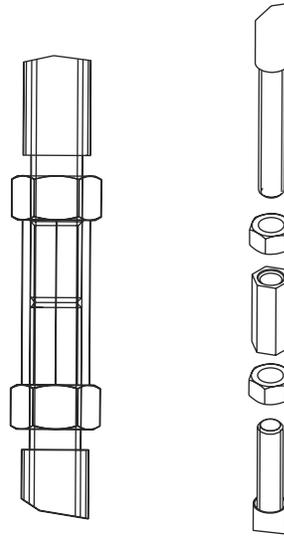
Threaded Rod and Coupling Nut Assembly
